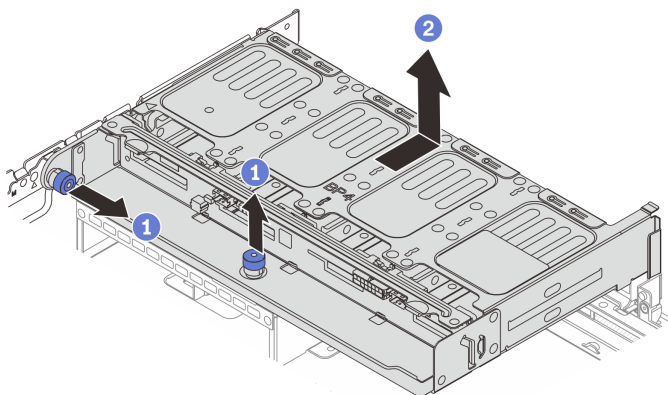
Removing the 8 x 2.5-inch rear drive cage
